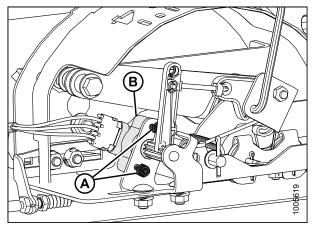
Most Common 5 Volt AHHC Sensor Assembly
